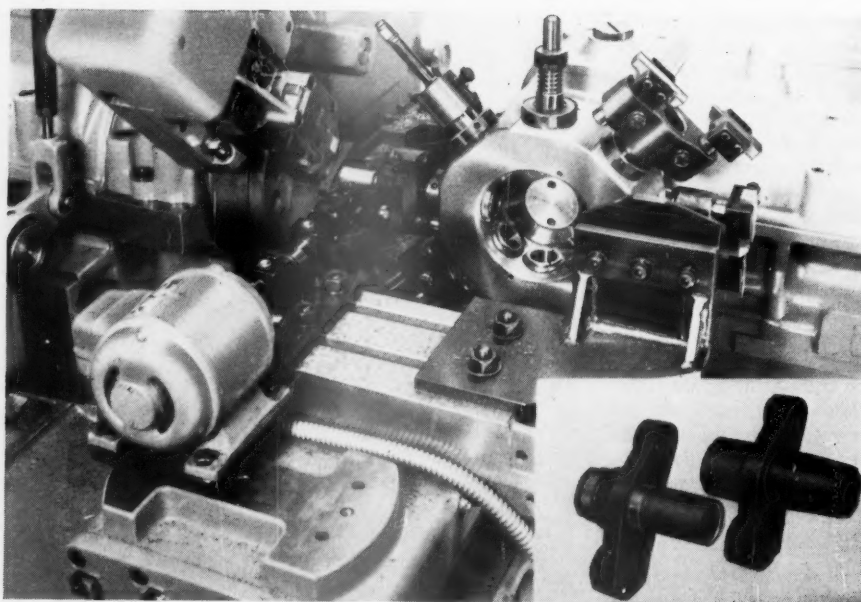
A chain tensioner housing is machined from both ends in one cycle. Reversing of the component is by a motor-driven attachment on the front slide
